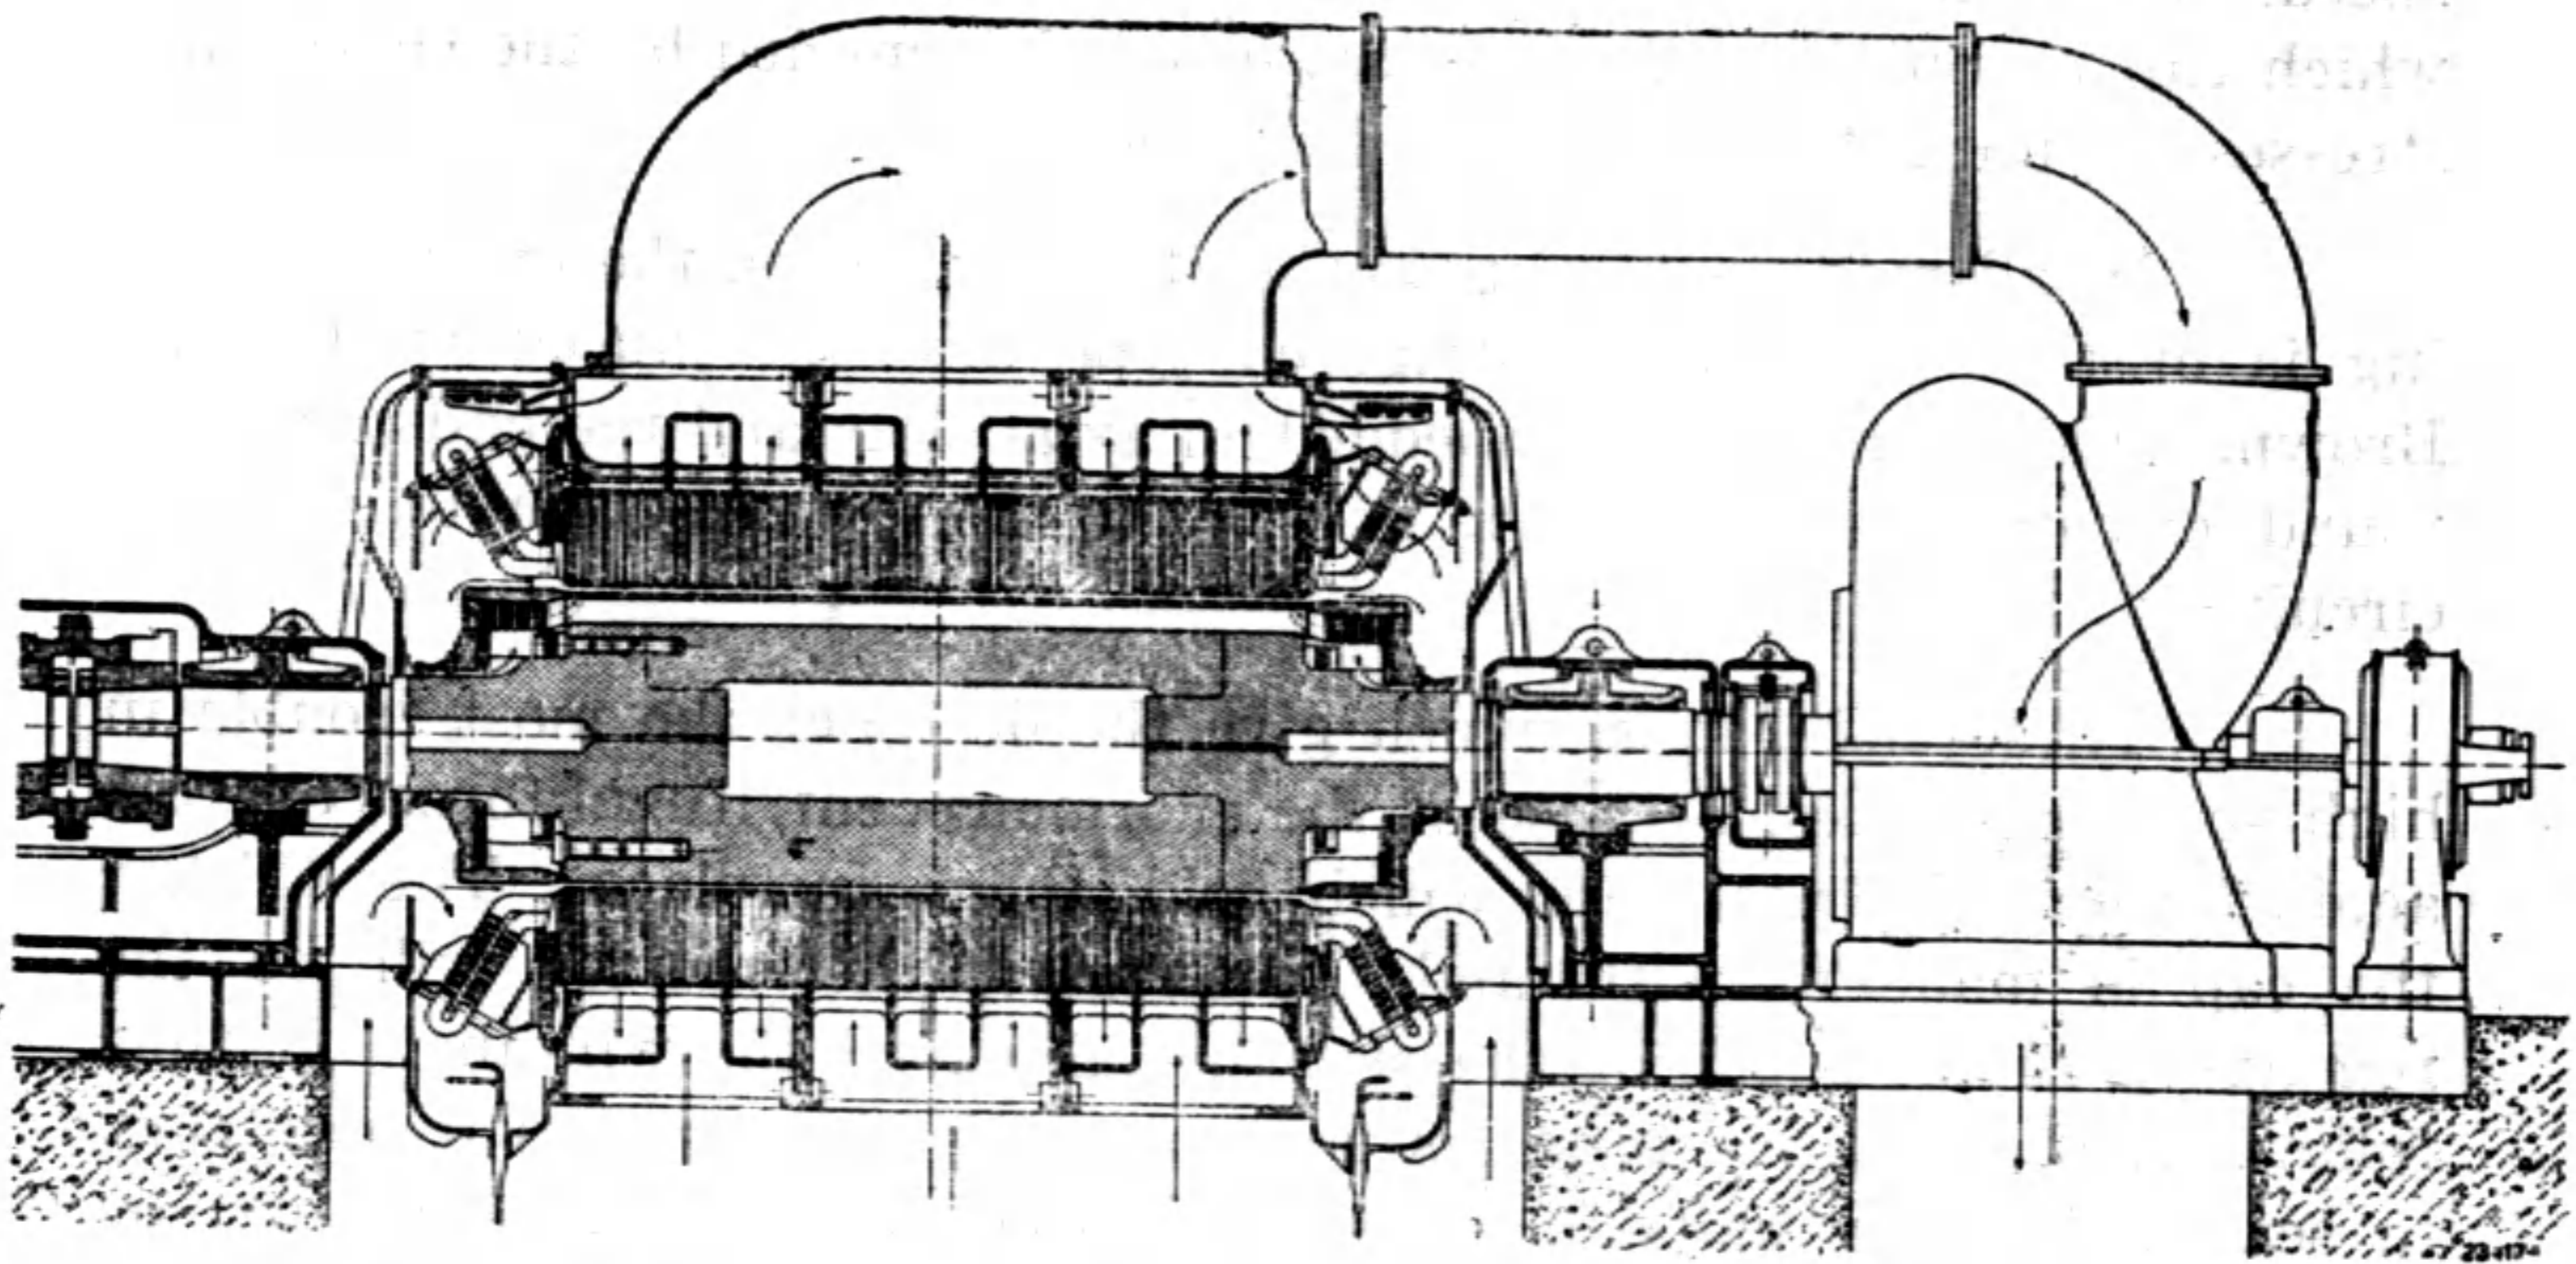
Section through 75,000 kw., 1,800 rpm Alternator with separate ventilating blower.
